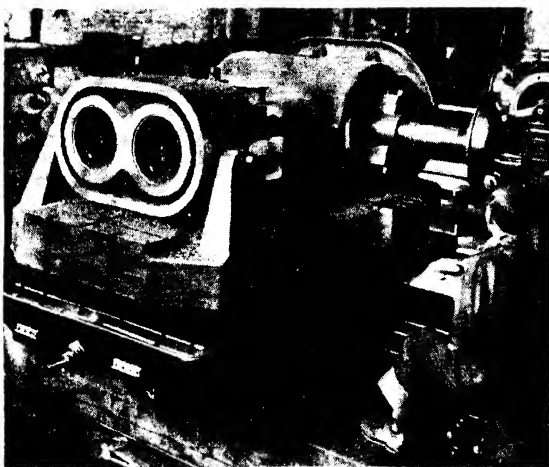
Heavy boring job on Giddings and Lewis machine.
